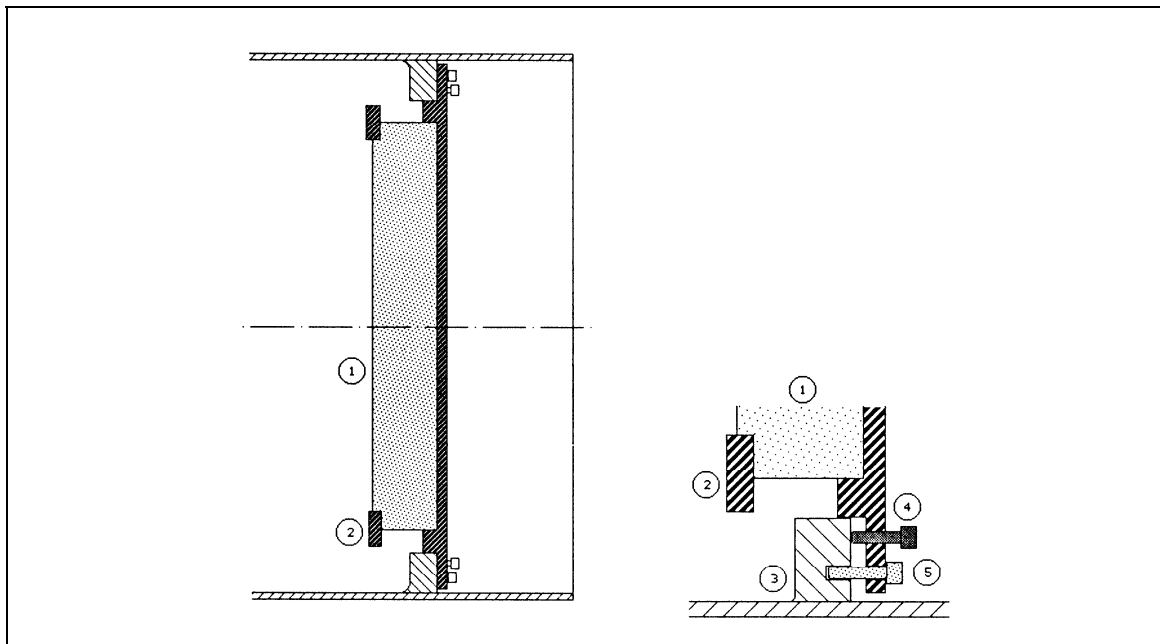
The rear of the telescope. The mirror attachment and the adjustment screw.
